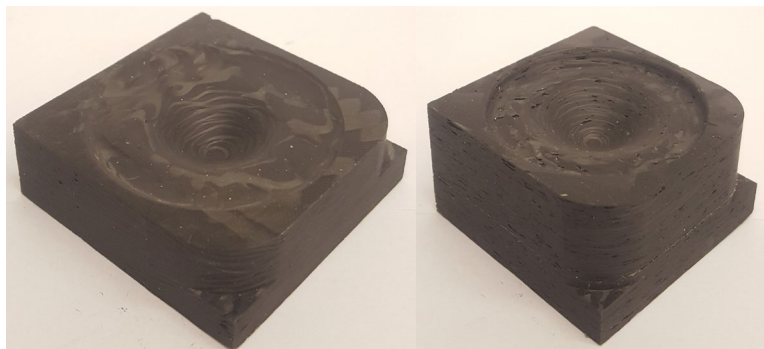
Woven (left) and chopped fiber (right) machined samples
